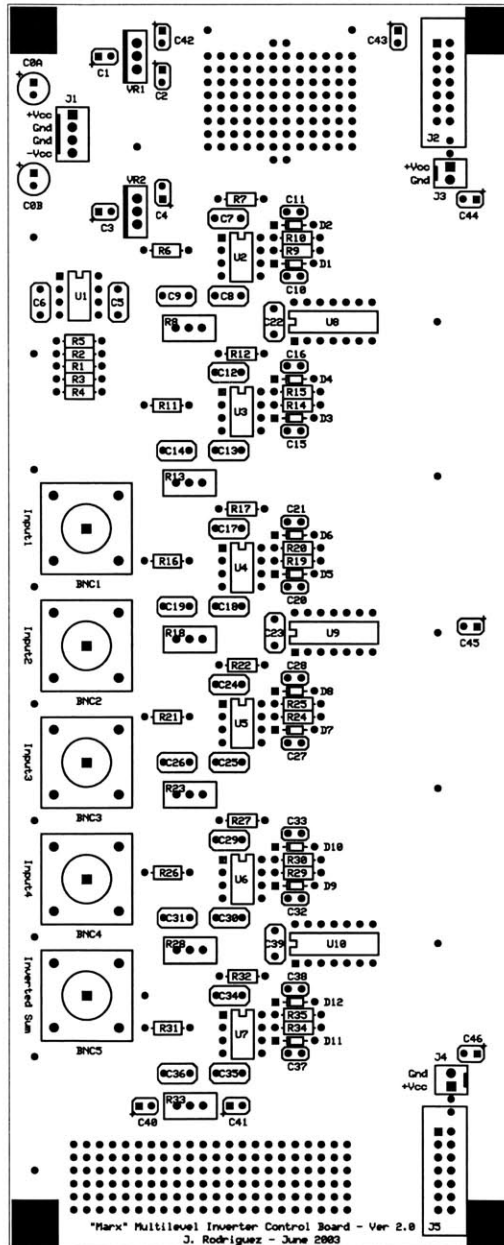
Marx Control Board PCB: Silkscreen with pads
